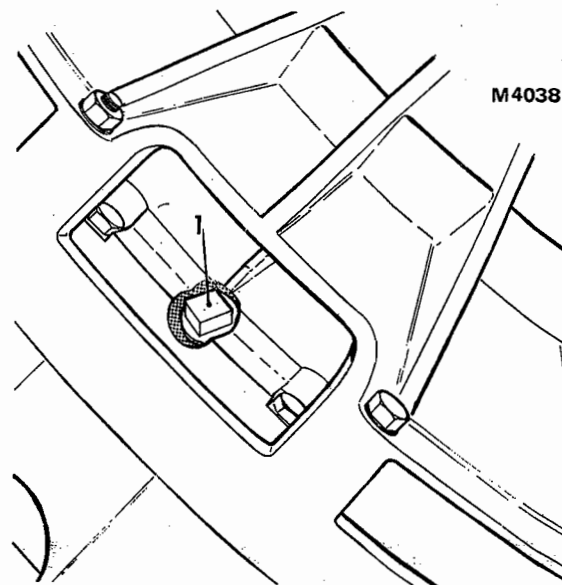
CLUTCH DRAIN PLUG THROUGH BOTTOM APERTURE
